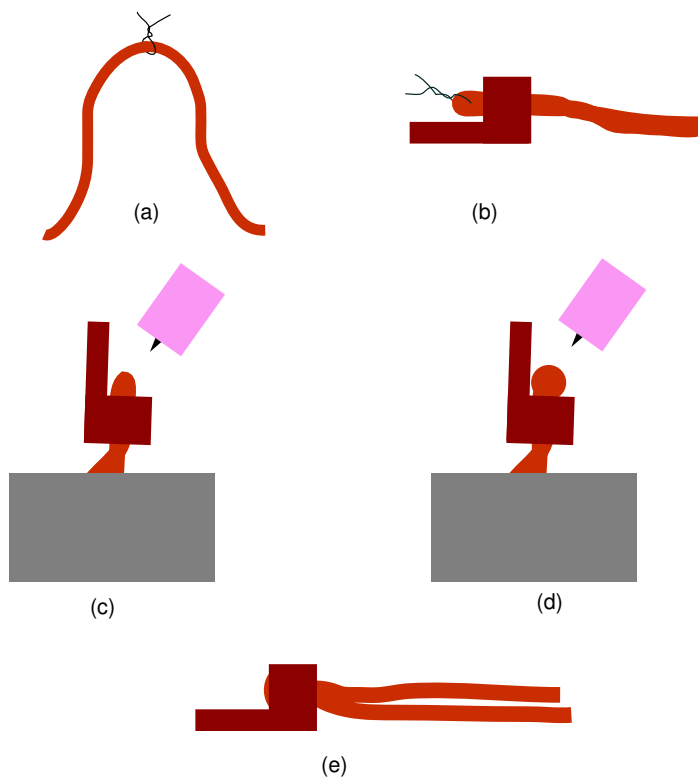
The process of welding copper rope to a copper lug.
